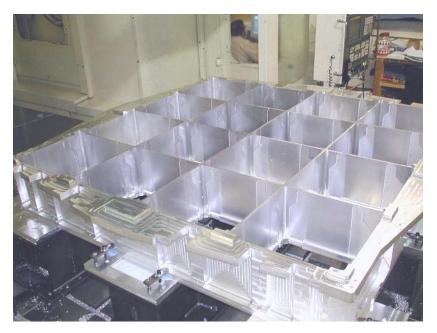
First grid, with all bays and Tracker cable chaseways machined.
